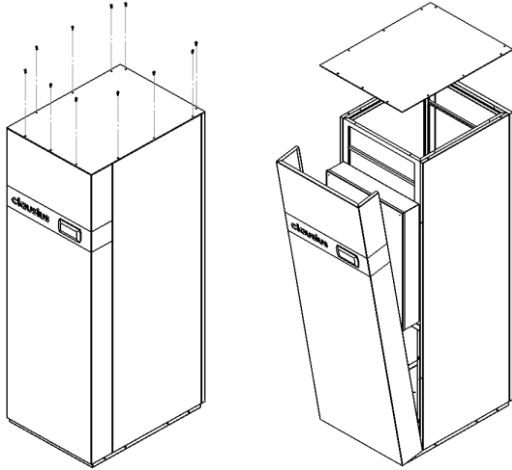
Disassembly process of the front cover of Clausius heat pumps with Elite configuration.
